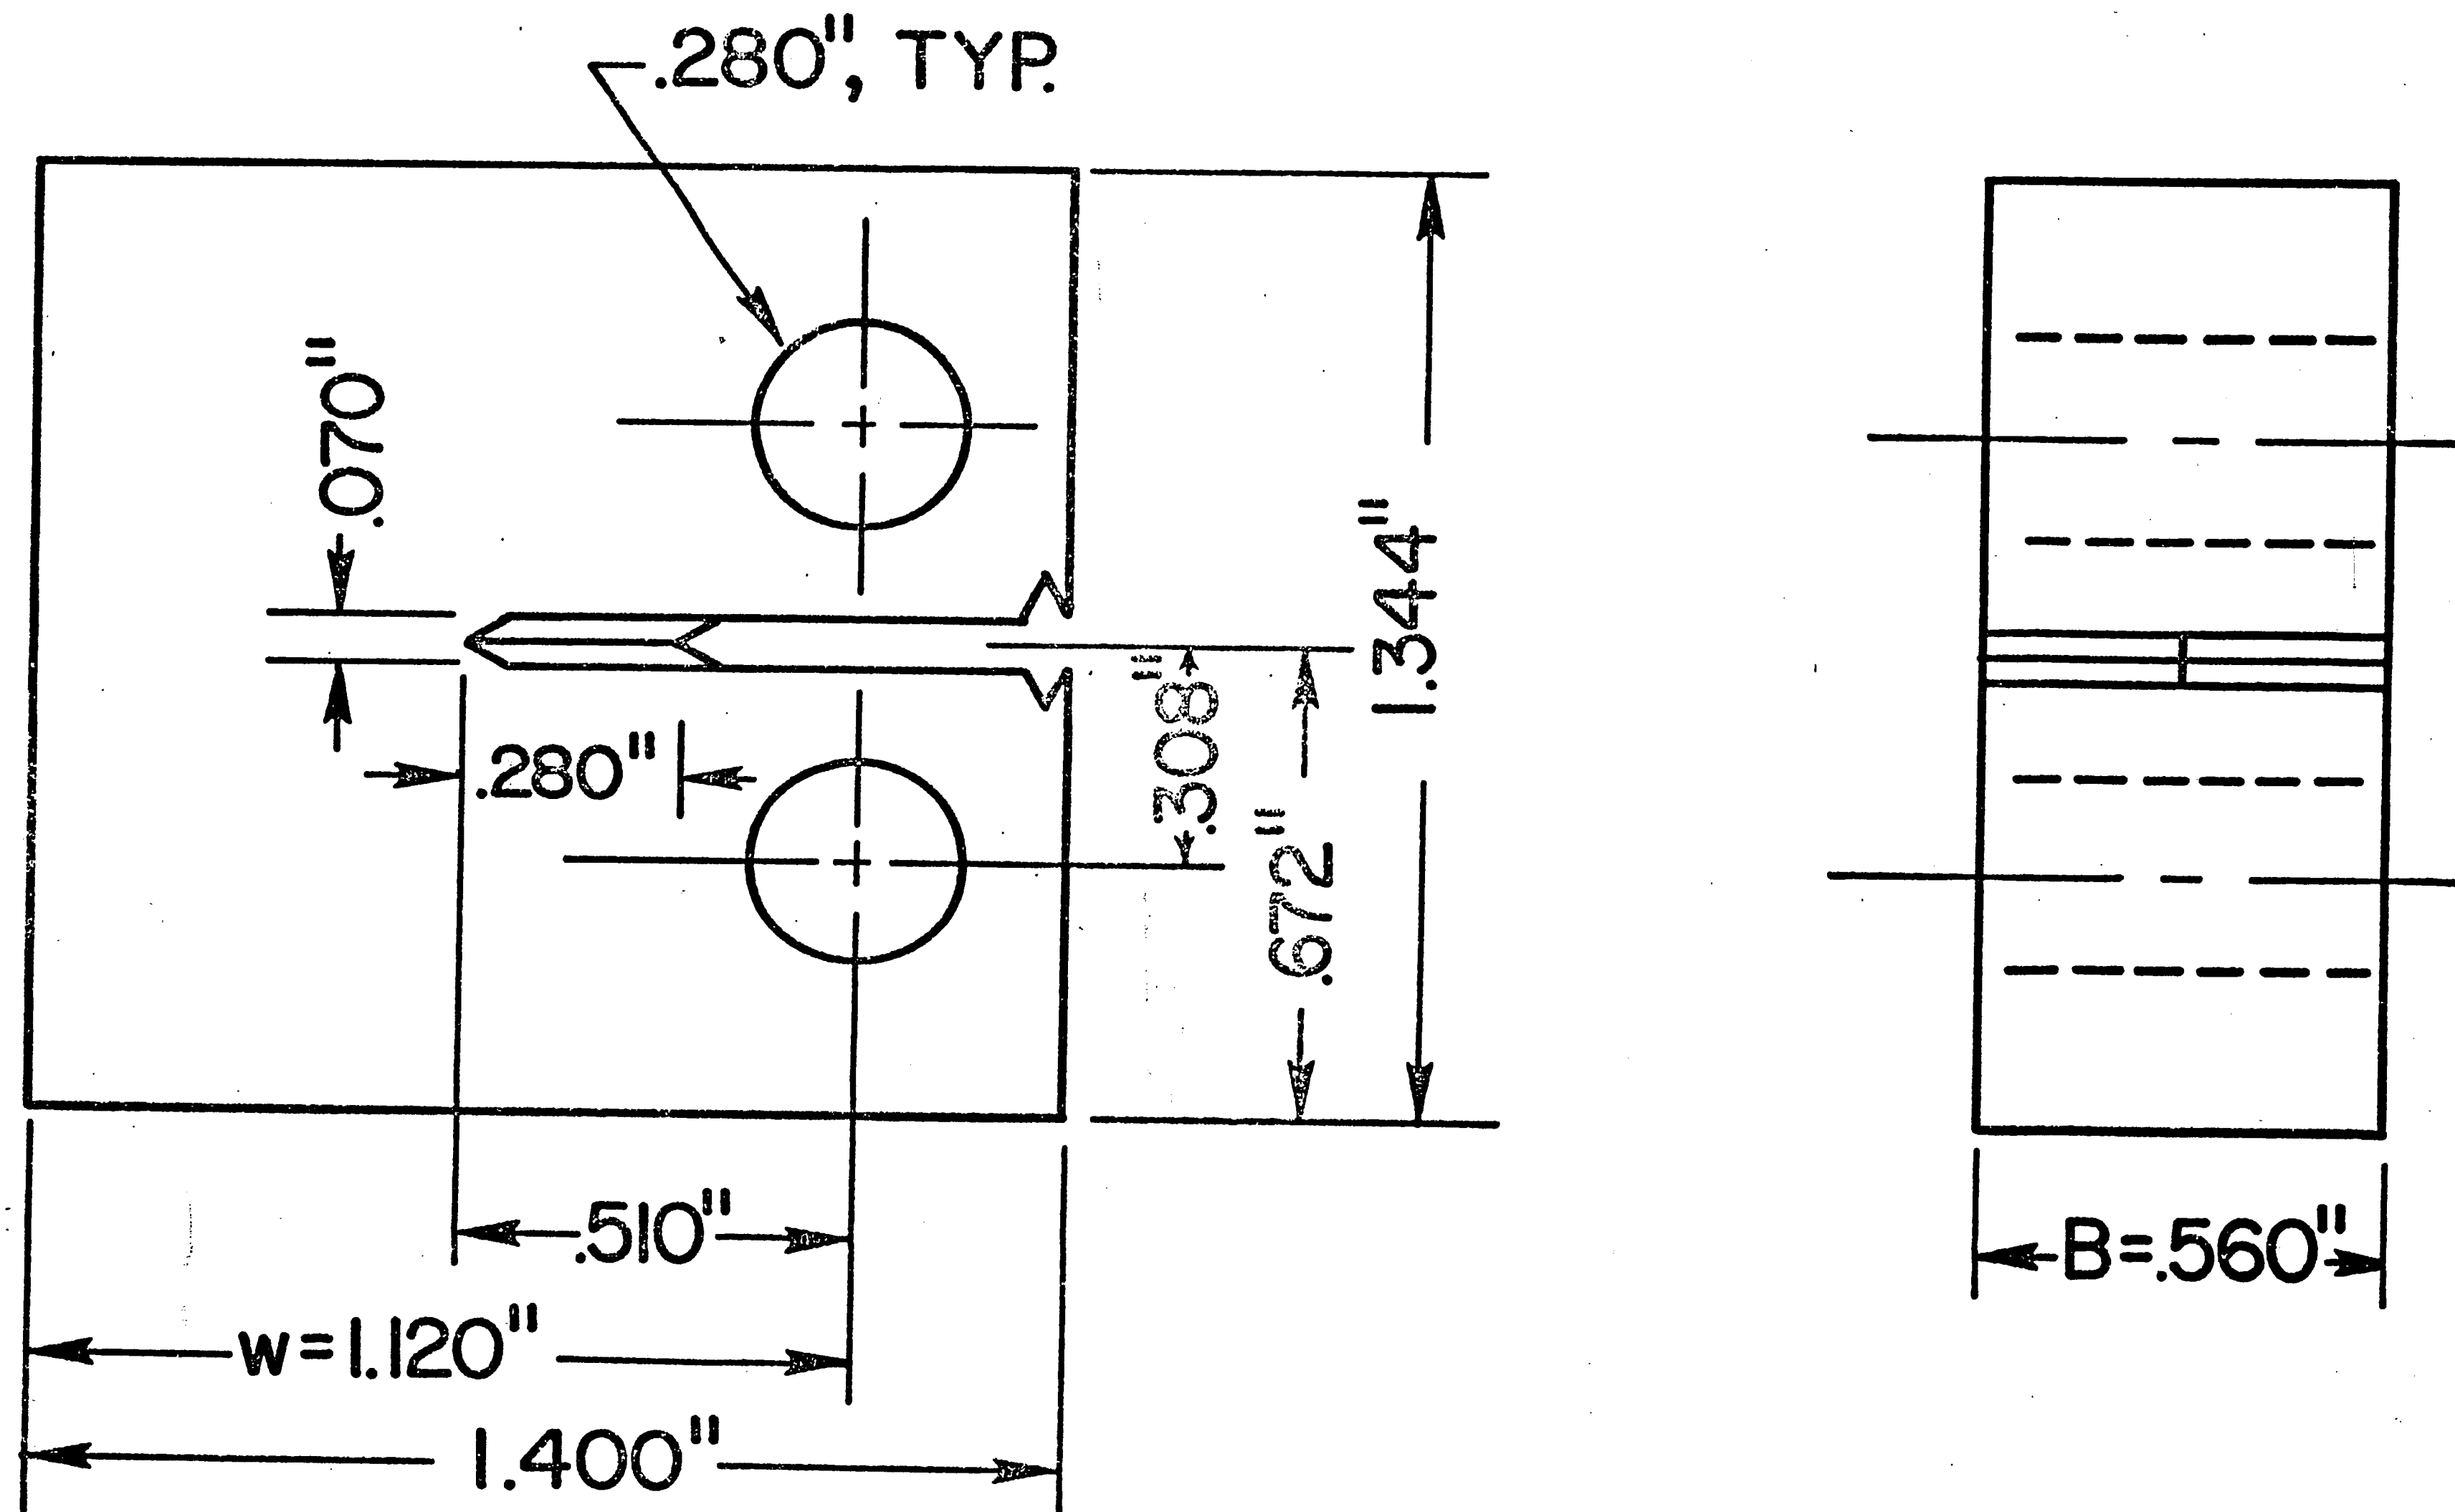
H-II STEEL COMPACT TENSION SPECIMEN
